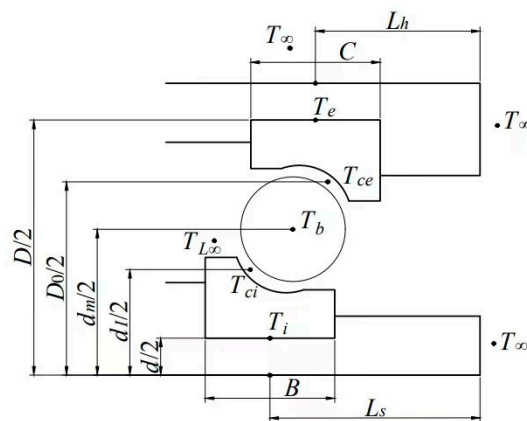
Temperature node diagram of key parts of bearing's internal components.
